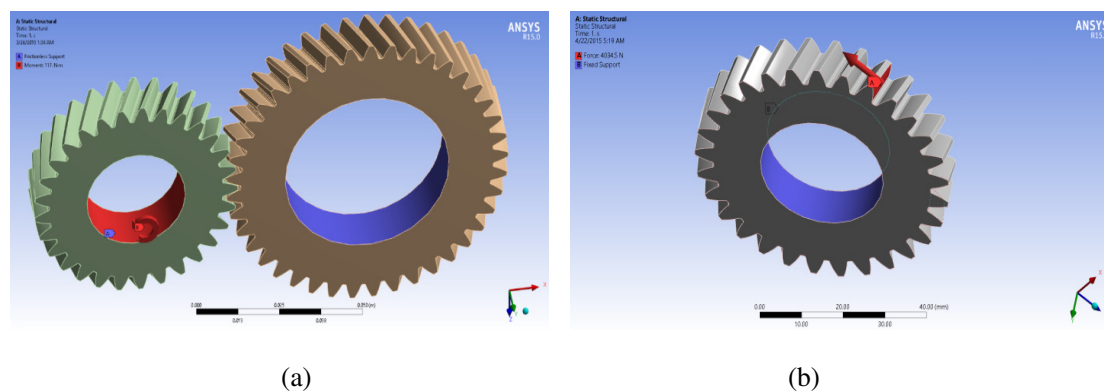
The loading on the helical gear for (a) contact stress and (b) bending stress
